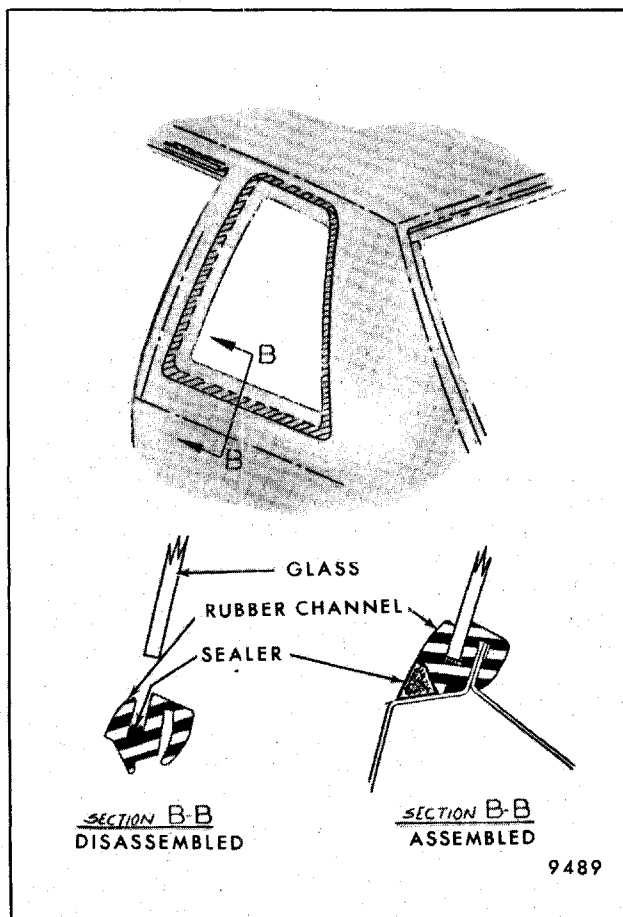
Outside Loaded Rubber Channel Sealing - "C" Styles Typical
